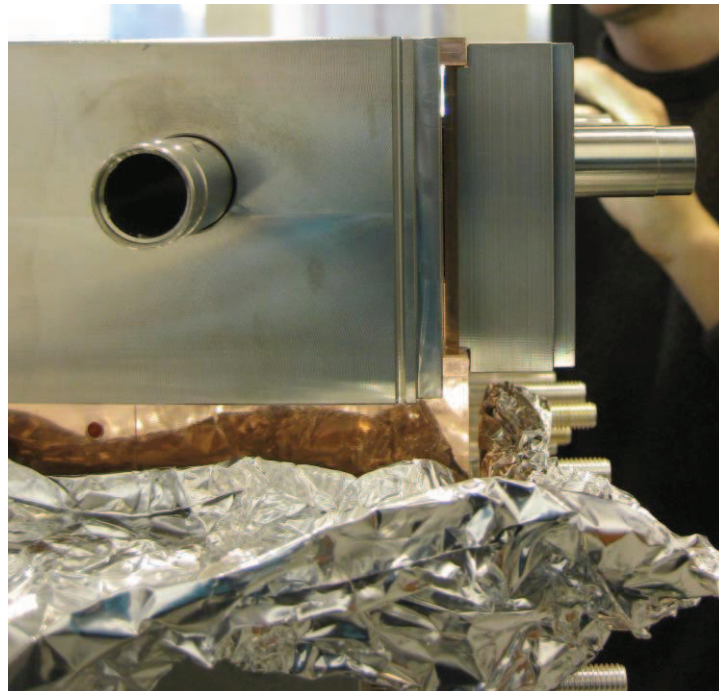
Visual inspection of the top flange (T) on E9 side
